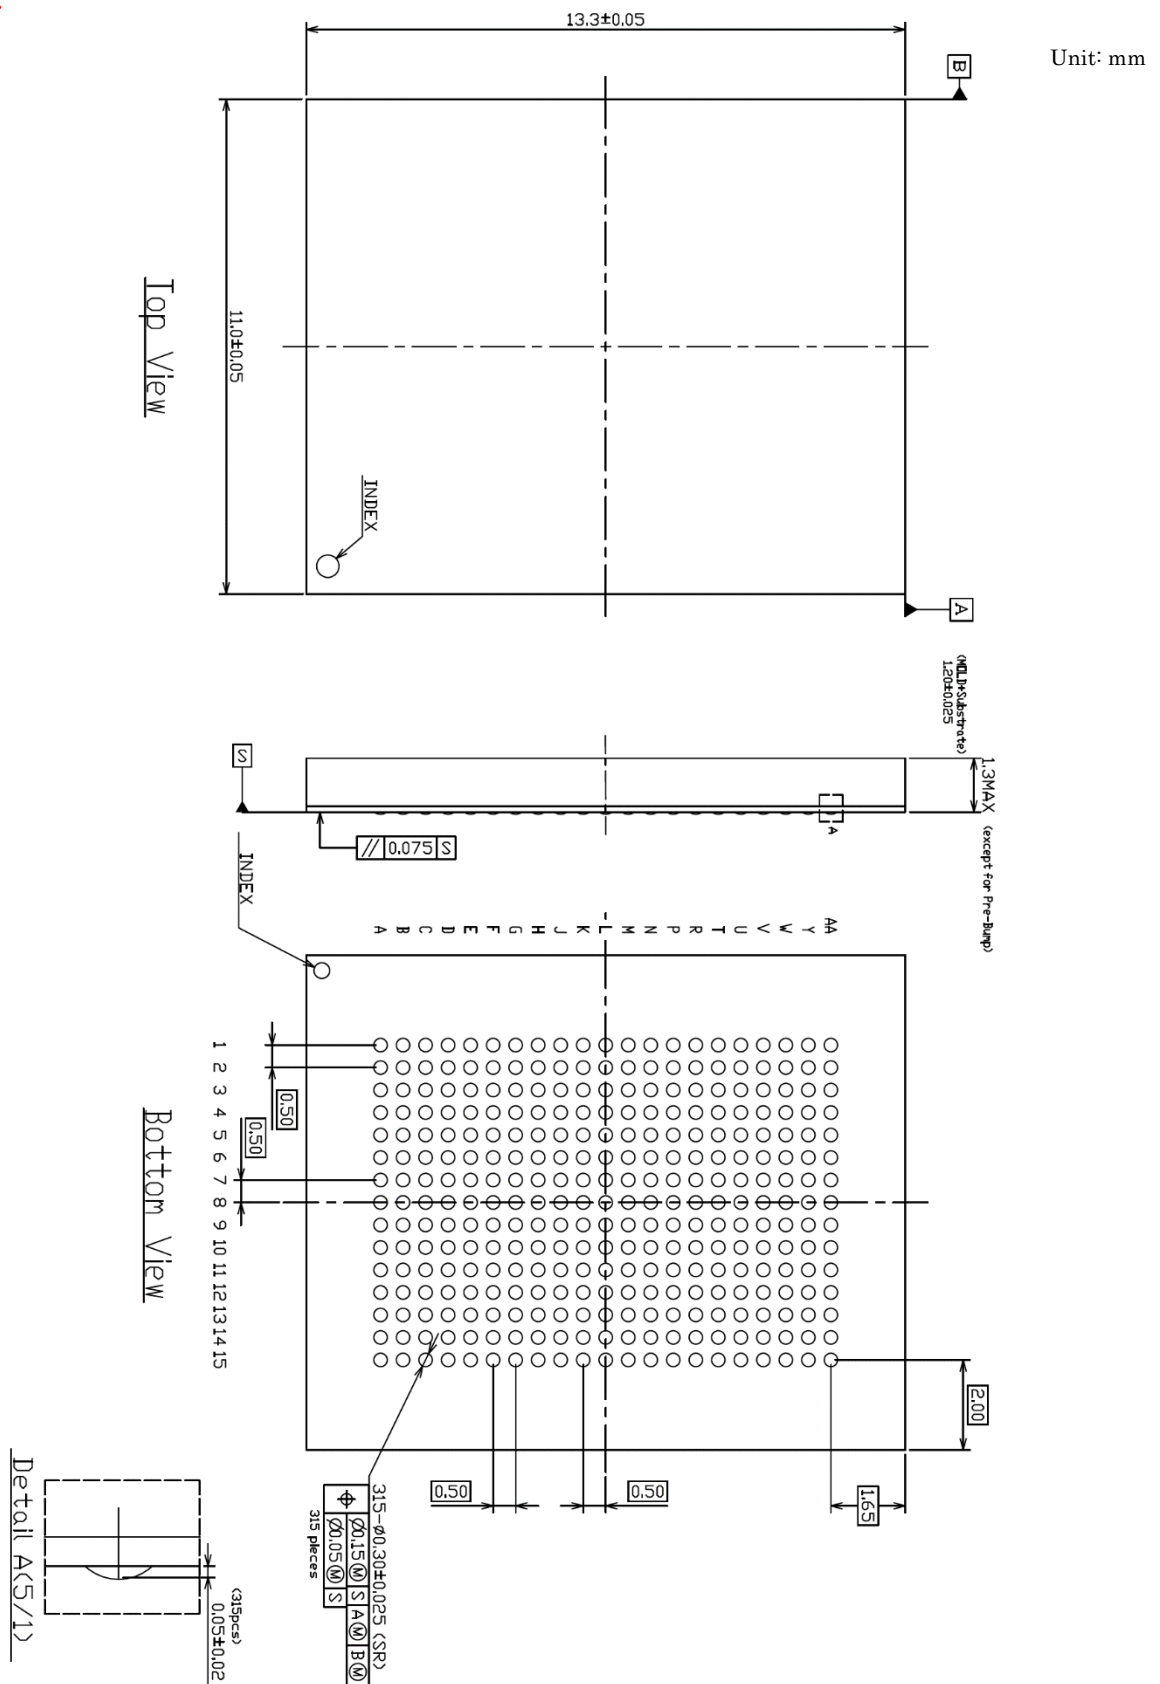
Package Dimension of P-FLGA315-1114-0.50-001
